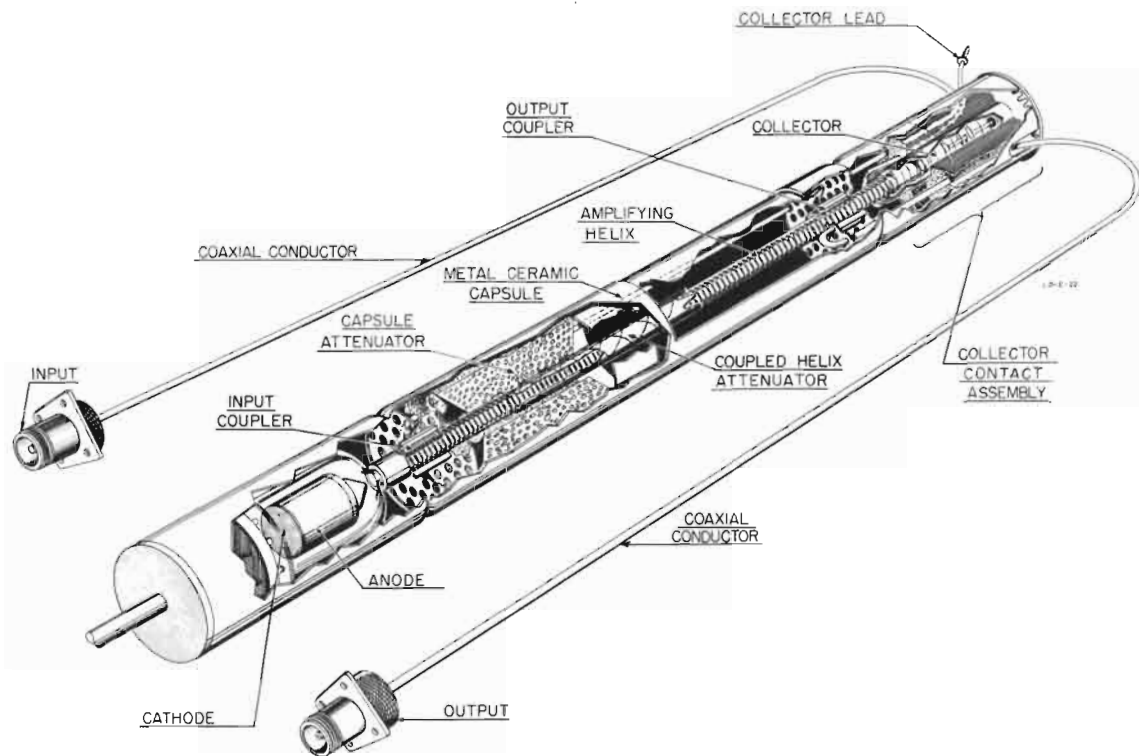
Cutaway View of an Encapsulated Traveling Wave Tube
